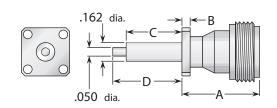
(1/2" square flange, interchangeable with SMA standard flange size)
